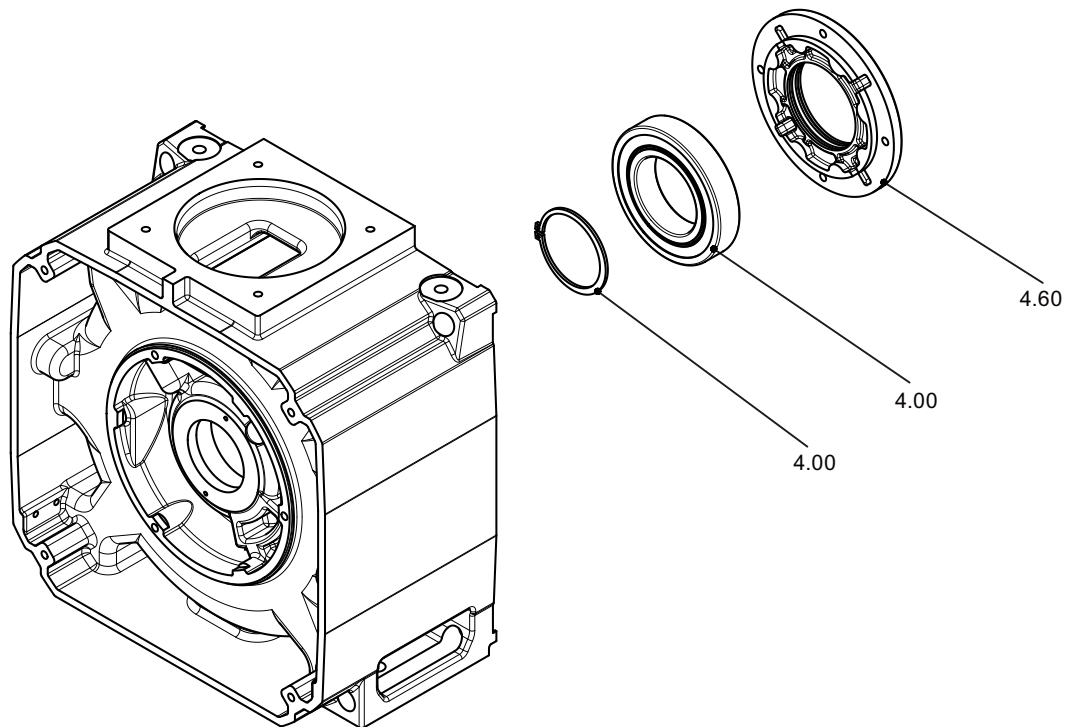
Roller bearing cartridge, non-drive end, permanent lubrication
